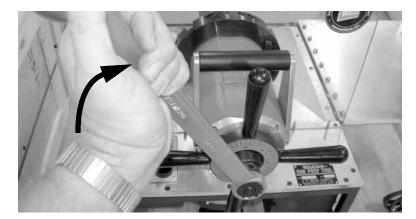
Turn the drawbar nut clockwise to extend the clamping legs.
